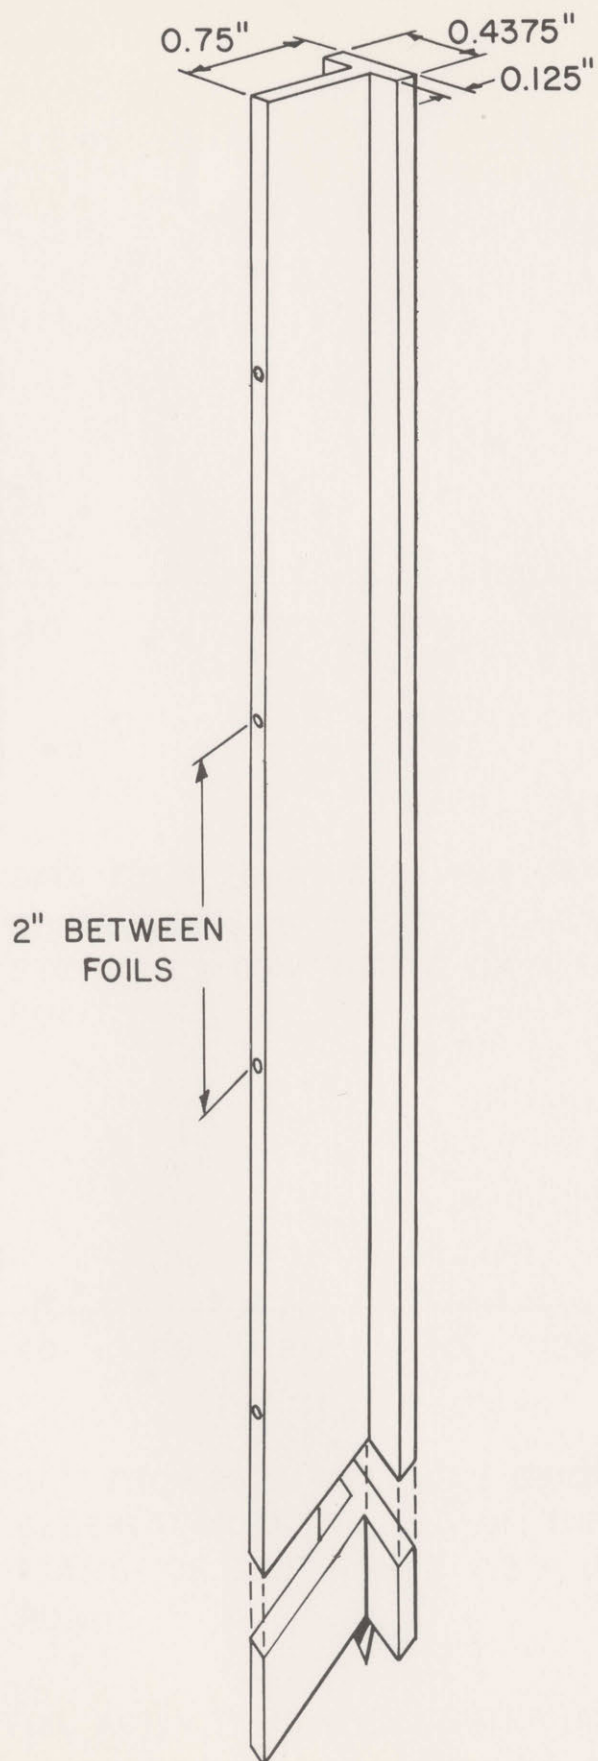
AXIAL FOIL HOLDER USED IN 253 ASSEMBLIES.
